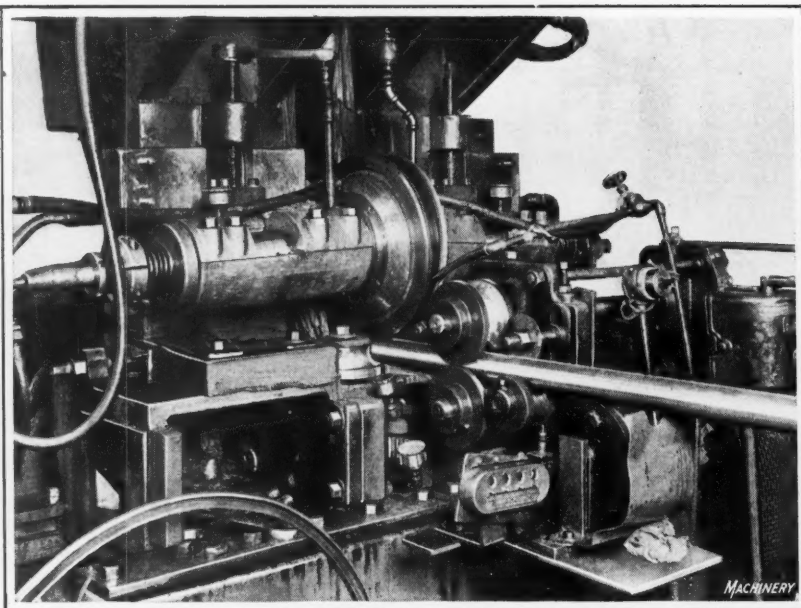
Feeding Side of the Electric Welding Machine
